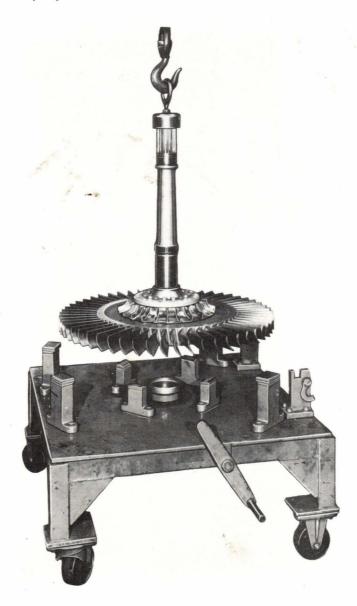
Installing the Turbine Rotor in Stand No. 2994 with Lifting Eye No. 2952
